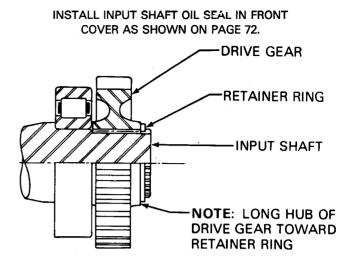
Input shaft, rear bearing, drive gear and snap ring.
